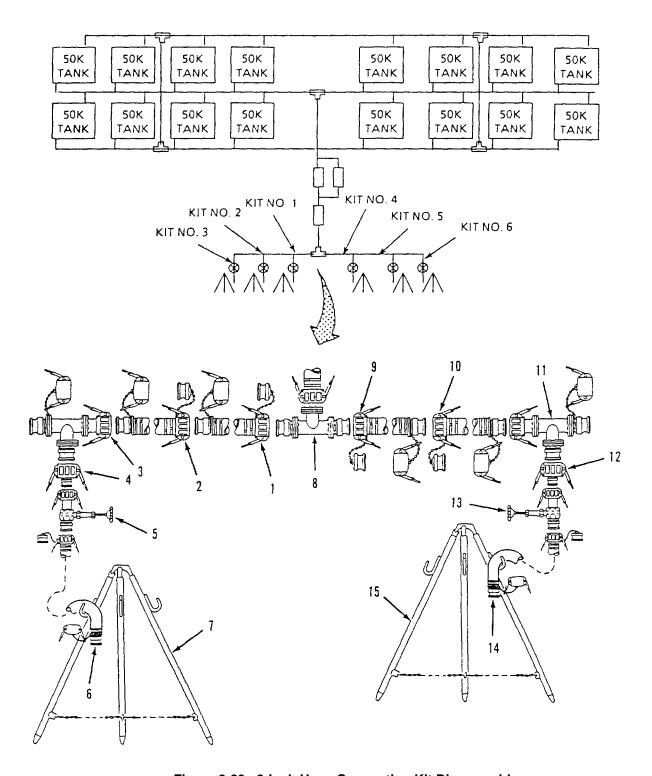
2-Inch Hose Connection Kit Disassembly.
